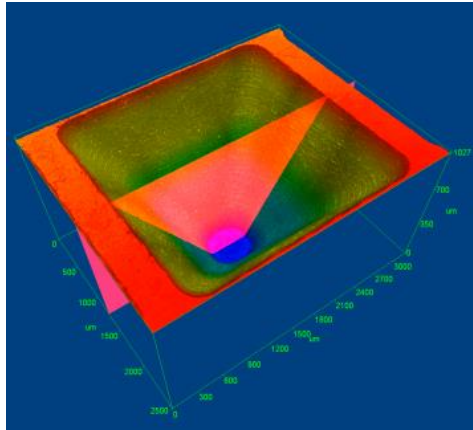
Machined sloped pocket scanned by Axio CSM 700 confocal microscope.
